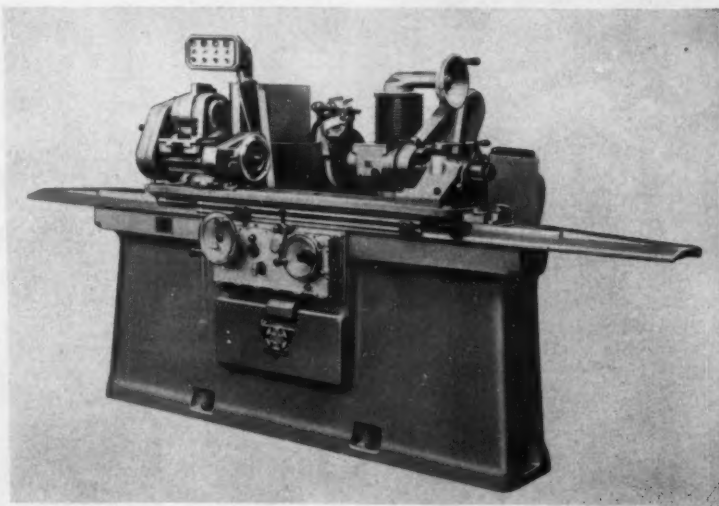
Precision grinding machine can be equipped with any one of four different wheel-heads
